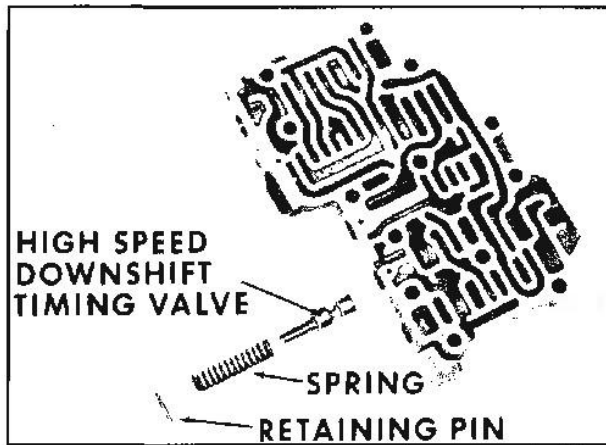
B-46 High Speed Downshift Timing Valve - Exploded View
